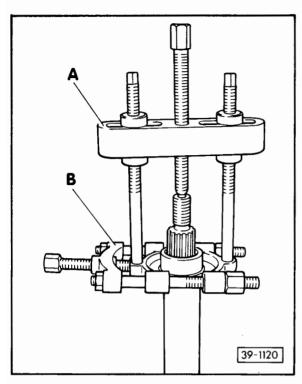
Removing washer and inner race of cylindrical roller bearing
